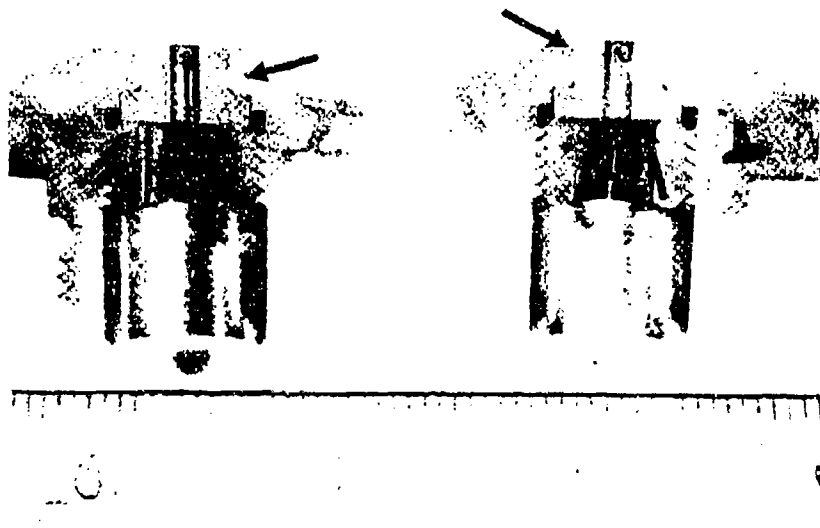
Photograph of a sectioned bushing assembly, with arrows pointing to the tungsten carbide bushing.
